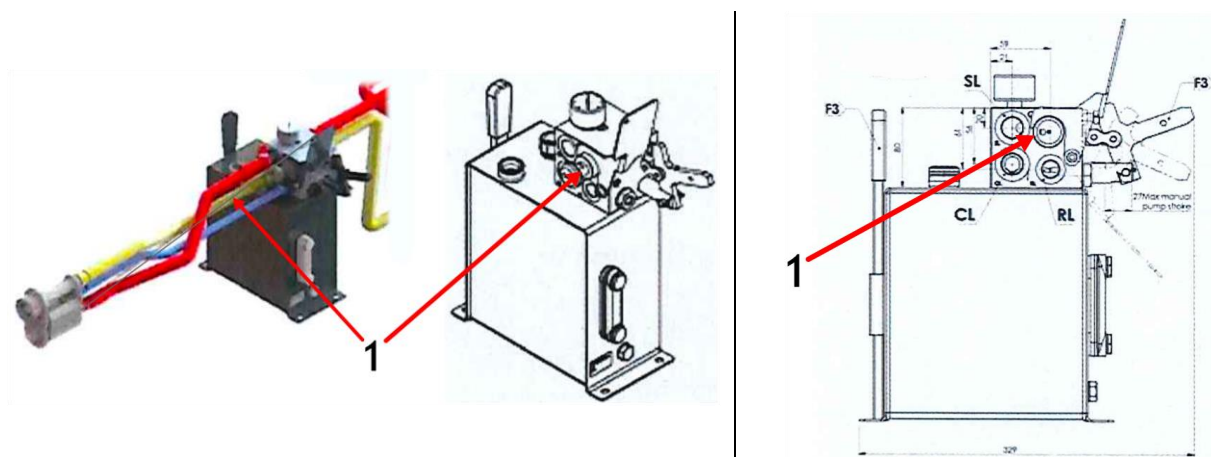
Marking where the metal cable is connected to its dedicated housing (1 - metal cable and housing (illustrative view on the left, view from the disc harrow side on the right))
